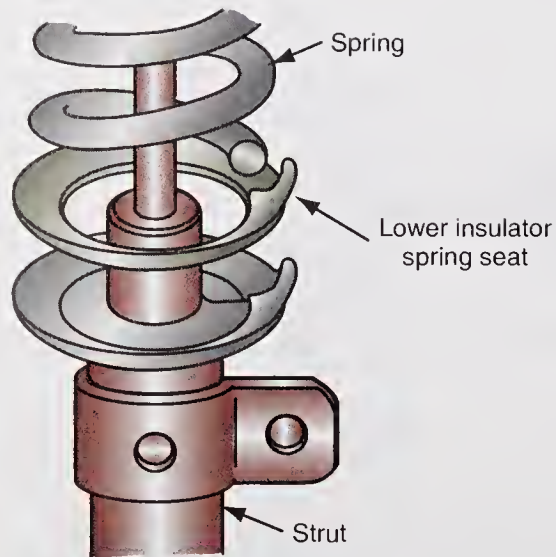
Installing strut in coil spring with proper lower spring seat alignment.
